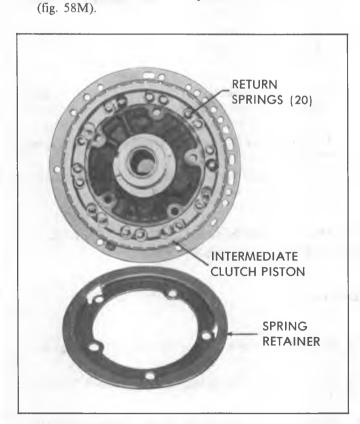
M--Intermediate Clutch Spring Retainer, Return Springs and Piston
